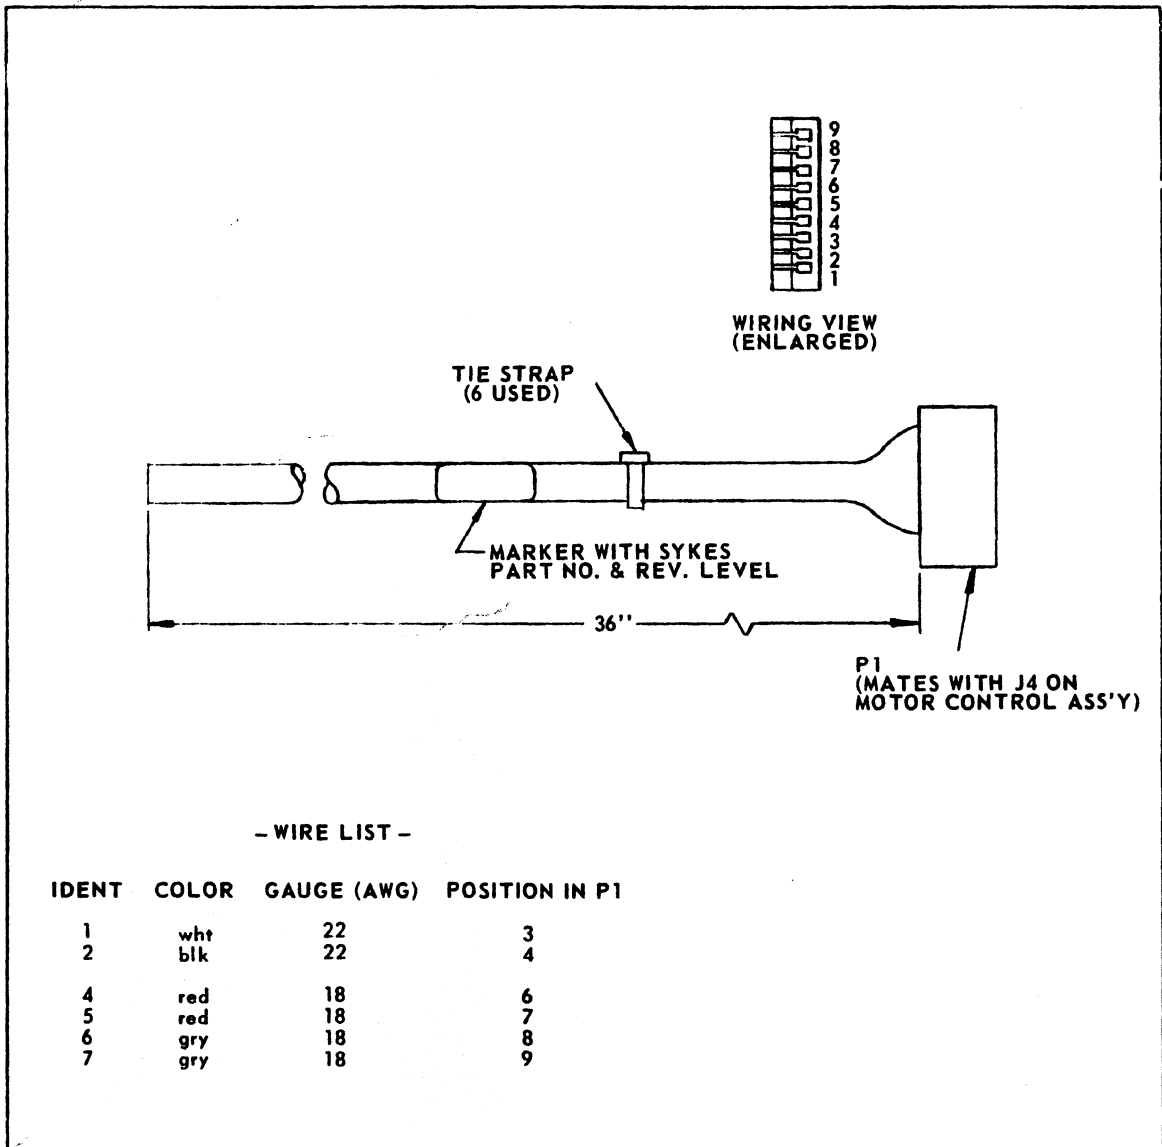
TT120 HIGH LEVEL HARNESS ASSEMBLY
